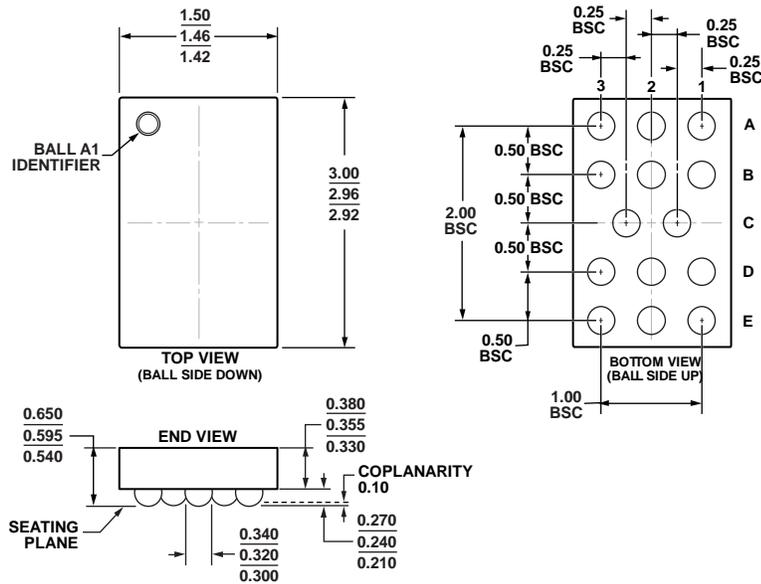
14-Ball Wafer Level Chip Scale Package [WLCSP] (CB-14-1)
